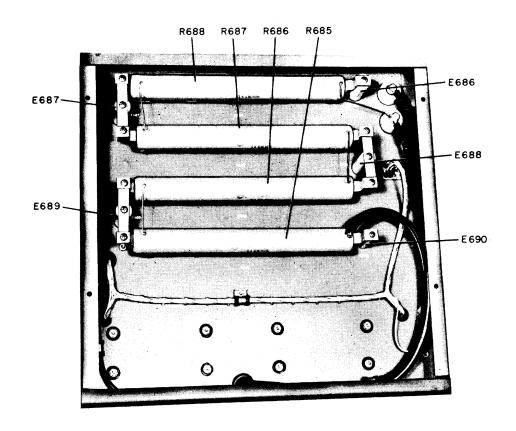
Power Change Assembly, Bottom View, Location of Parts
